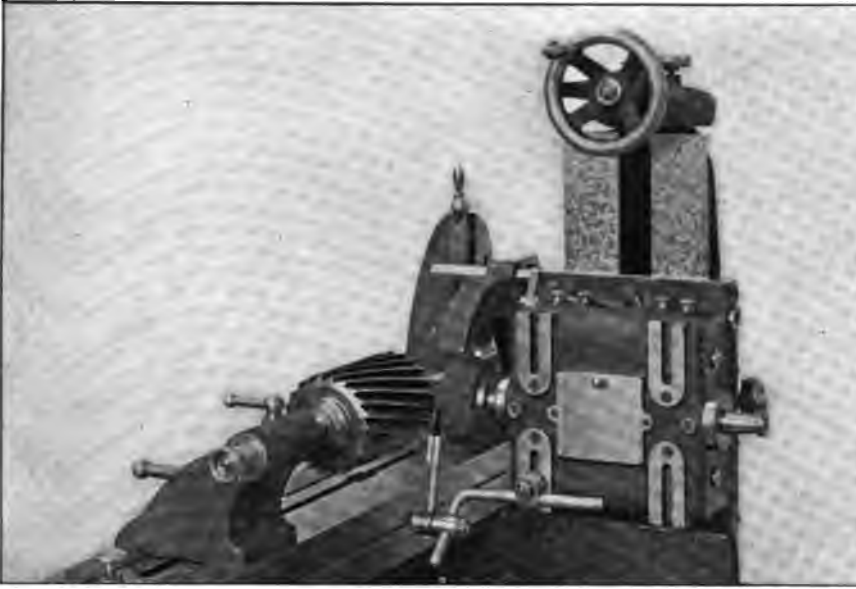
The difficulties formerly attending the accurate grinding of spiral milling cutters have been pretty well eliminated in several recent universal cutter grinders. A cup wheel grinding the land back of the cutting edge.
